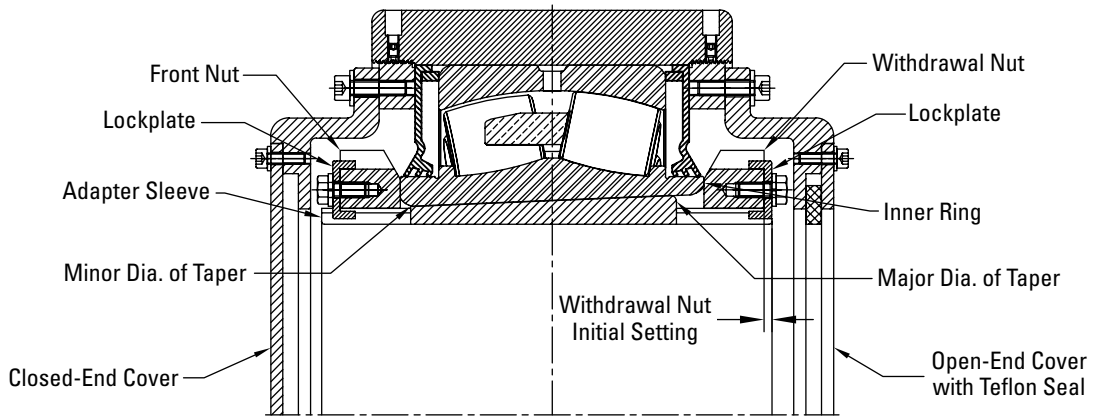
Cross-sectional view of bearing sizes 23144K and larger.
